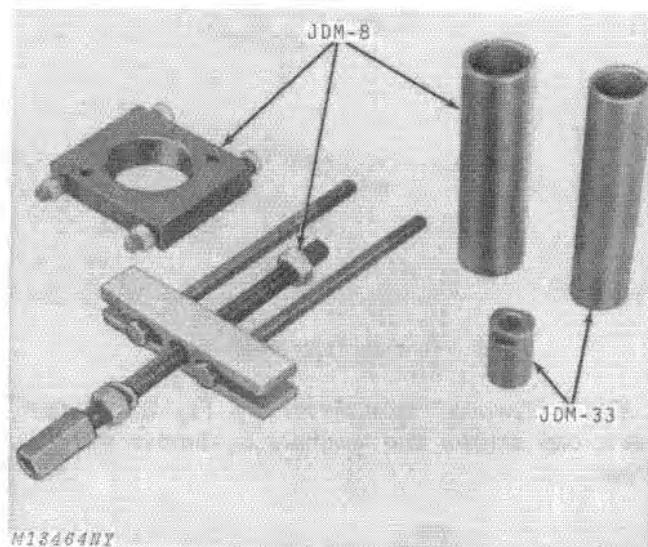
Crankshaft Bearing Service Set and Bearing Tool Adapter Kit
